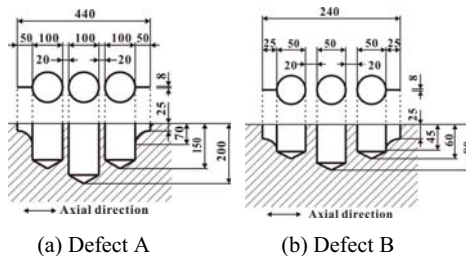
Shape and dimensions of holes having crack-like thin slits at the both ends (in  $\mu\text{m}$ )
